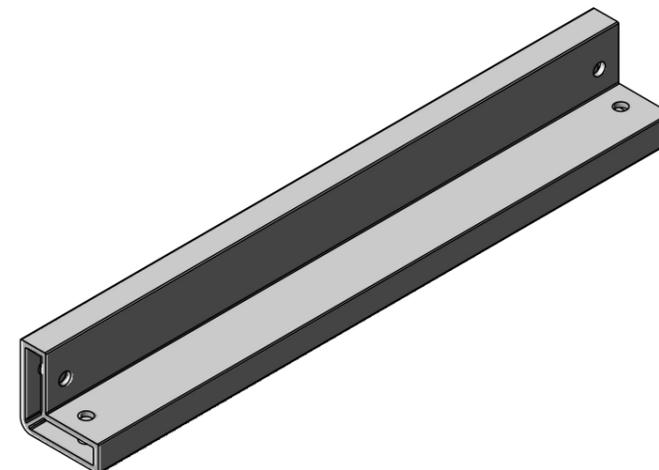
Corner profiles manufactured from PPS. Length: 294 mm; wall thickness: 2.5 mm
